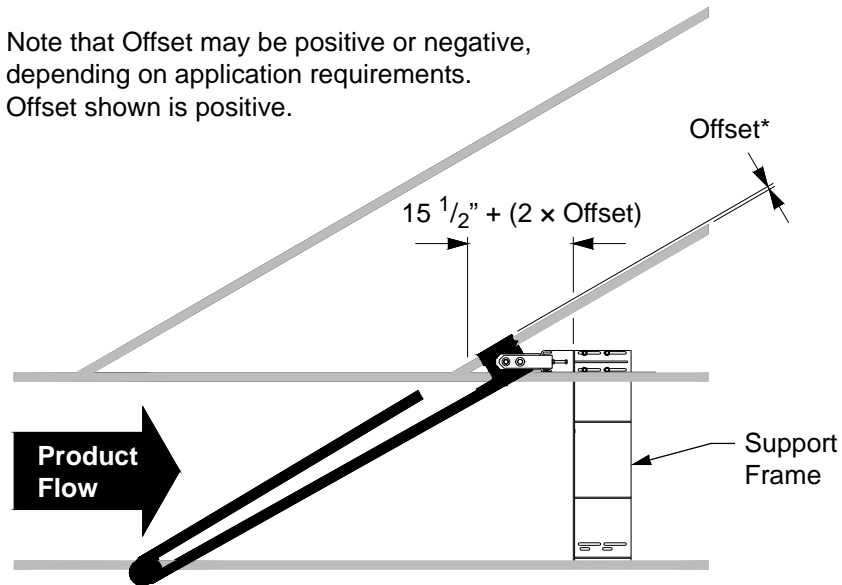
Determining the Installation Location – Junction Side Installation
